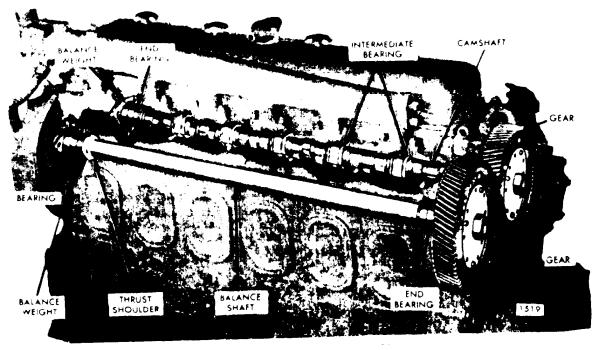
B-147. Camshaft and Balance Shaft Assemblies
